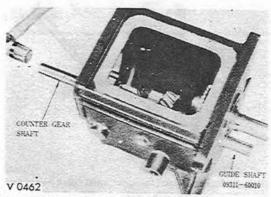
Installing the counter gear shaft in the transmission case.
